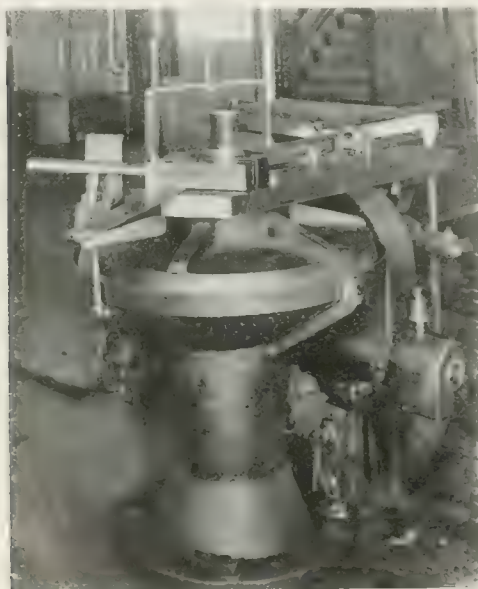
BENDING MACHINE ON WHICH THE HEAVIEST STRAP WIRE IS BENT TO ANY FORM DESIRED
